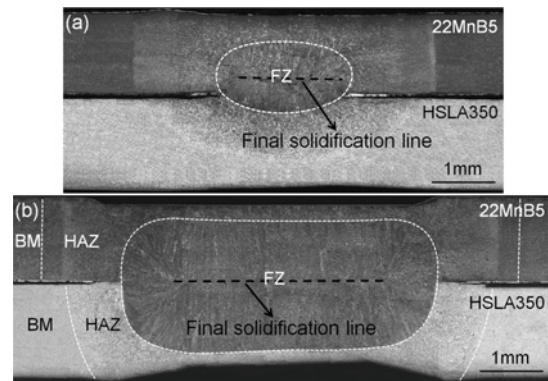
Typical macrostructure of the joints welded with the welding currents (a) 4 kA and (b) 8 kA
